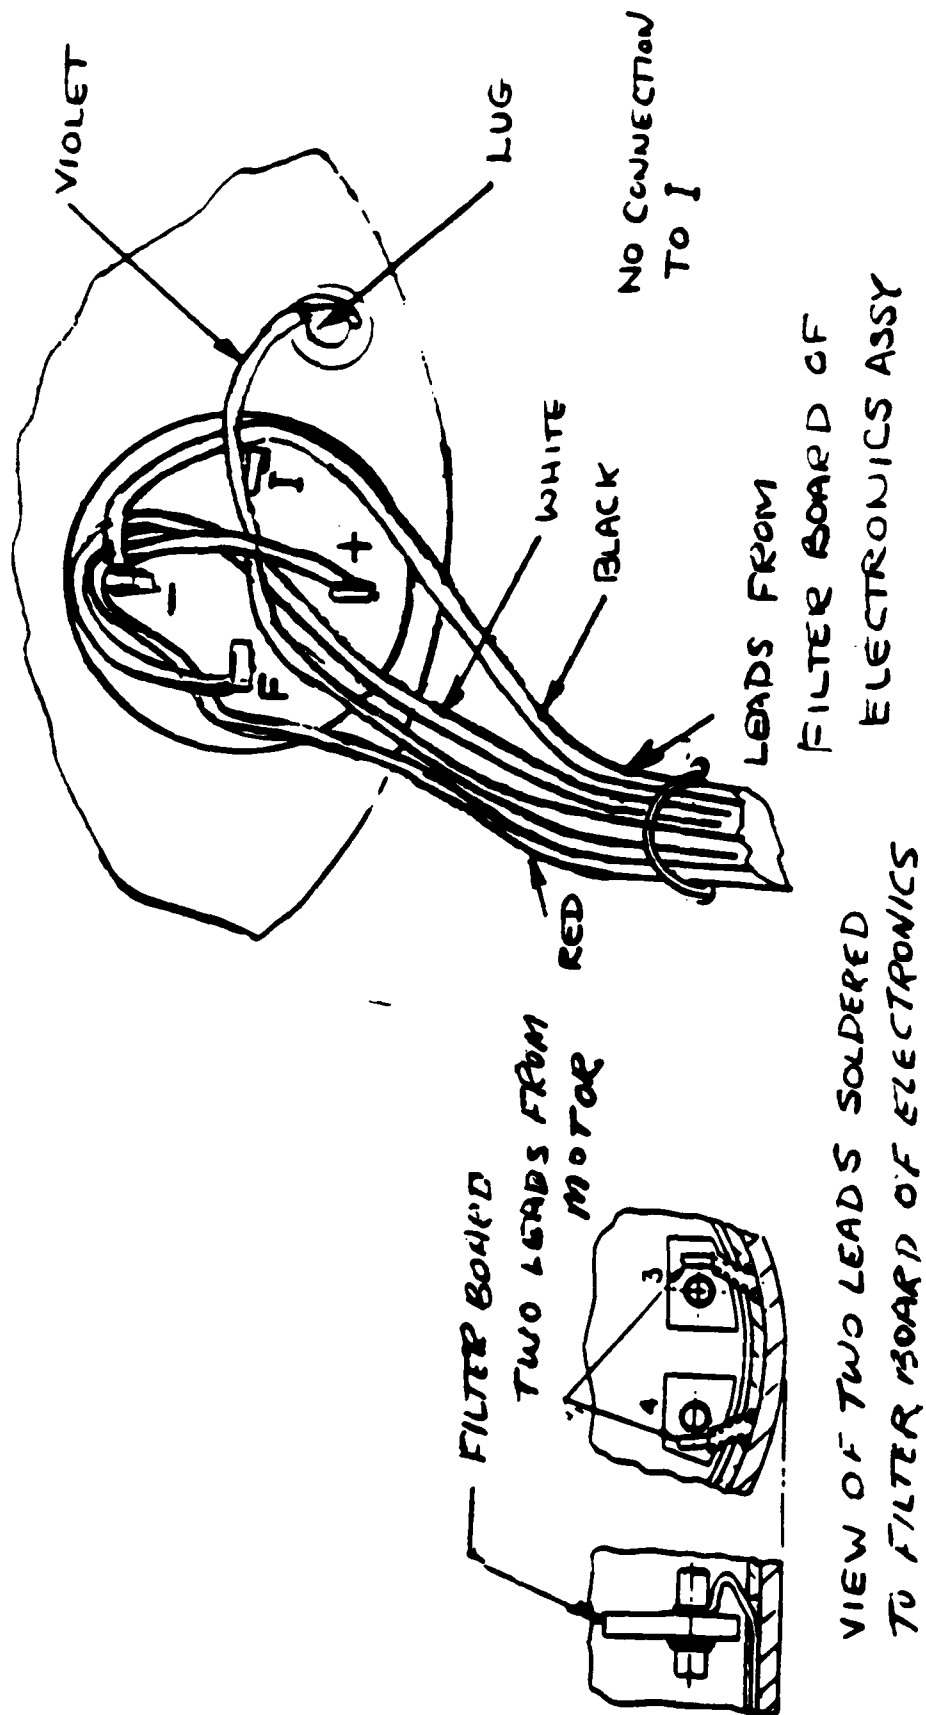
Soldering of Driver Electronics into the Compressor
